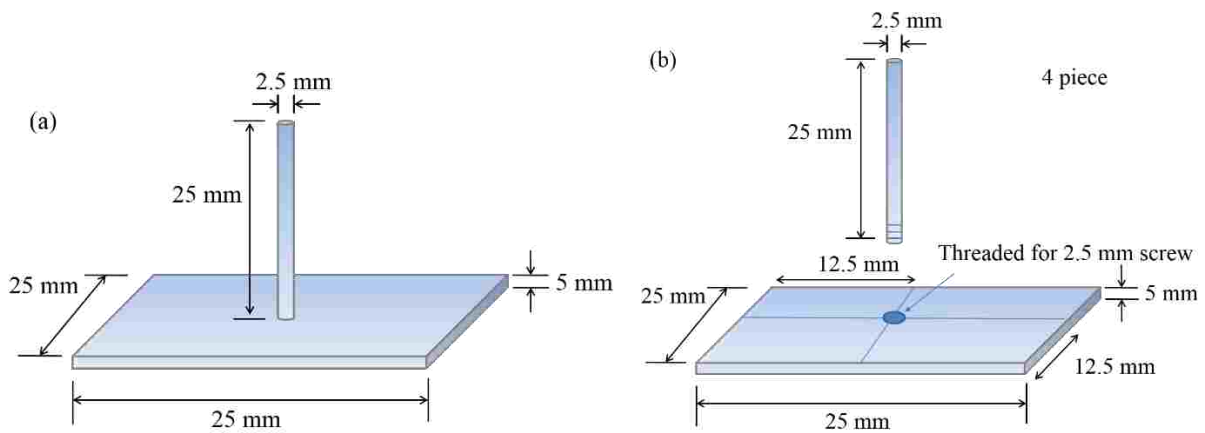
(a) assembled deflecting plate design and (b) separate plate and rod.
